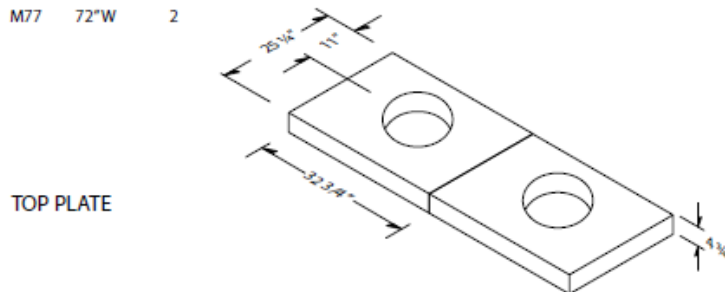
MAGNUM 60 AND 72 SERIES DIMENSIONS
